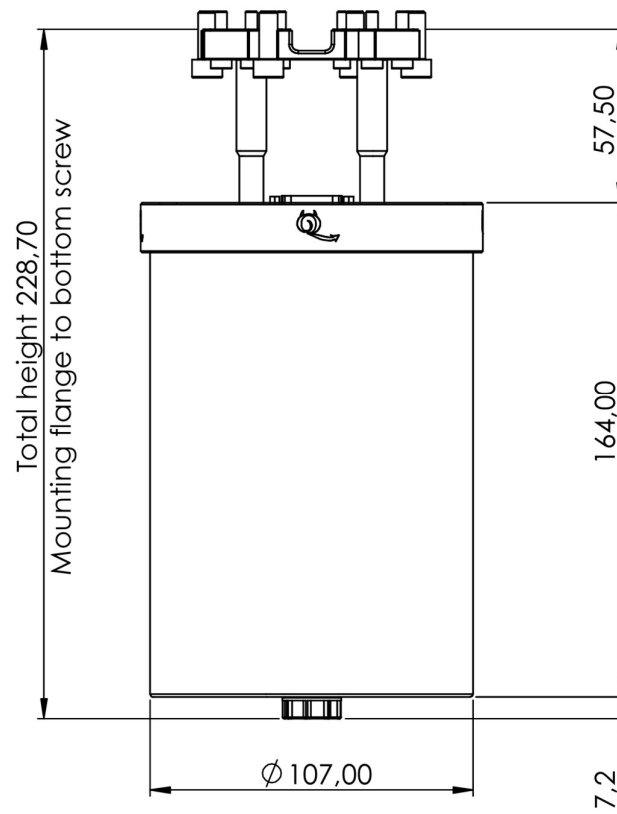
Side view of QCage.64 standard configuration CAD drawing.
